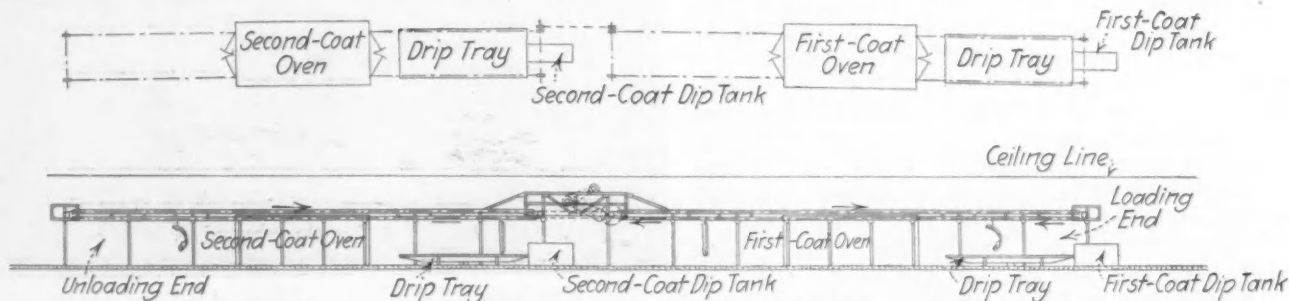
PLAN VIEW AND SECTIONAL SIDE ELEVATION OF A SEMI-CONTINUOUS TYPE OF FENDER OVEN
